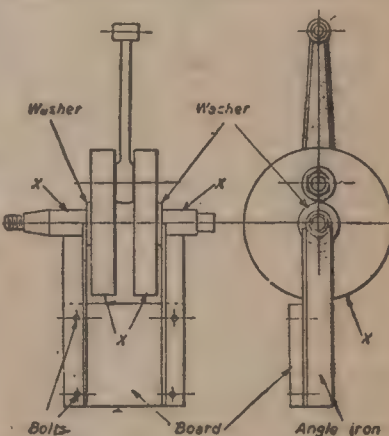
Simple jig for testing the crankshaft assembly. Check at points marked "X."
